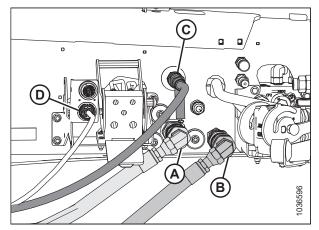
Header Drive Hydraulics – M2260 Connection Locations, Low Pressure Case Drain Kit B6698 Installed
